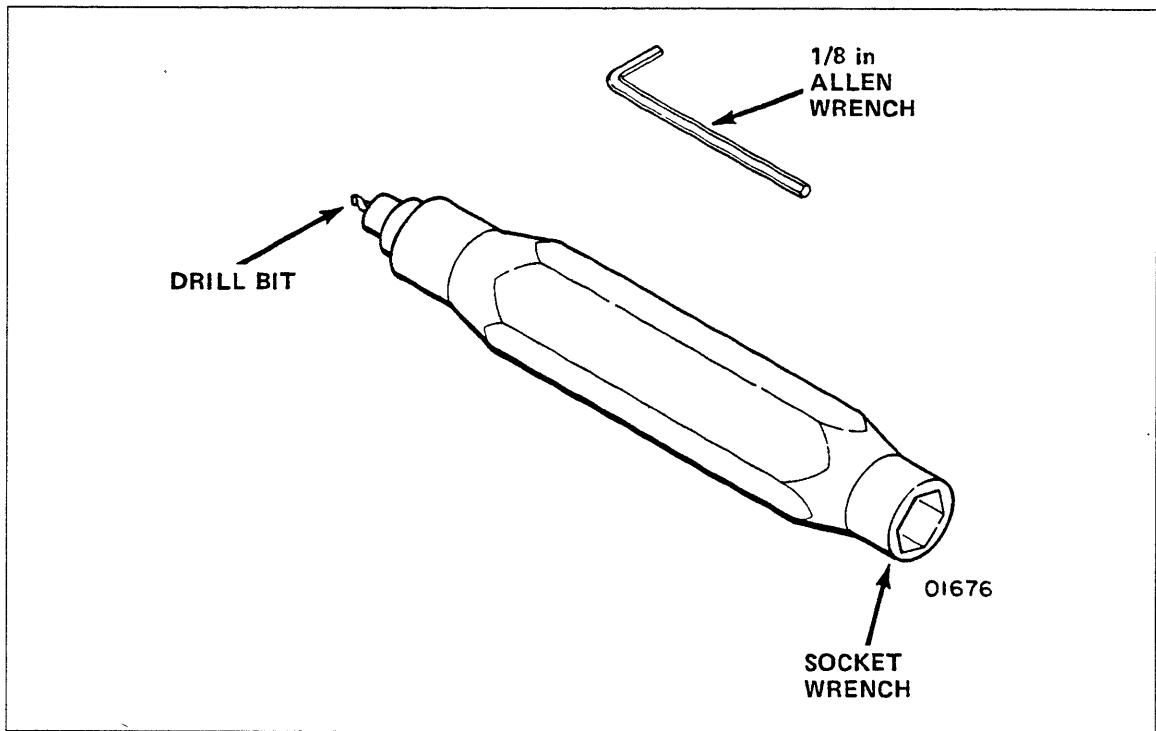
Cable-Tap Tool Kit for YA331A Tap Block
